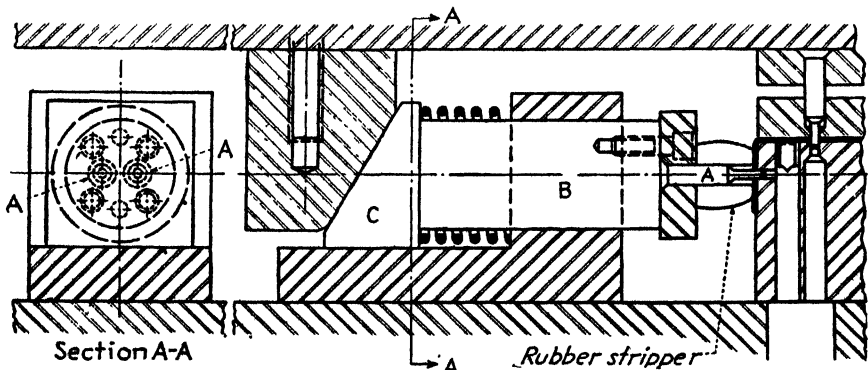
When rivet holes are closer than 1-in. centers, flat-head punches are mounted in a round punch slide with a flat-bottomed heel.
